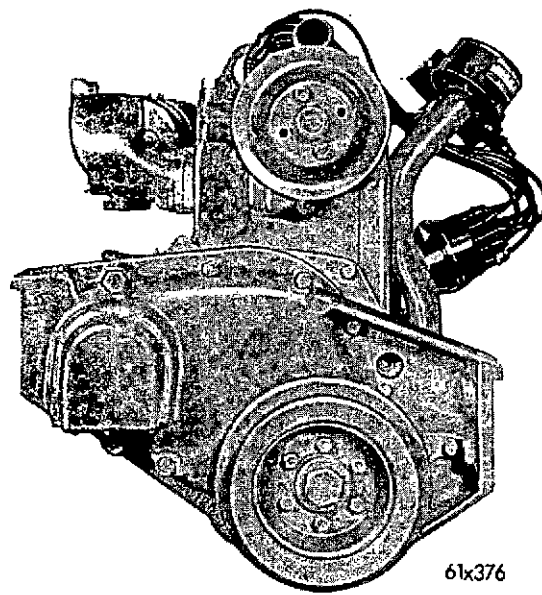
Special Accessory Drive Gear Front End Case Cover Installed
